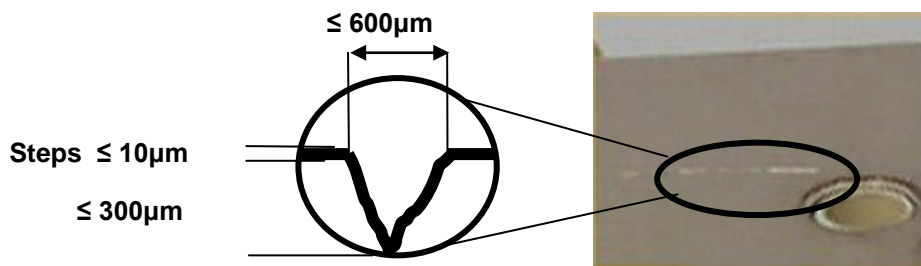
Scratches on the MiniSKiiP[®] bottom surface
